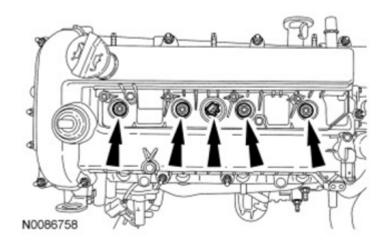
Locating Spark Plugs And CHT Sensor Courtesy of FORD MOTOR CO.
